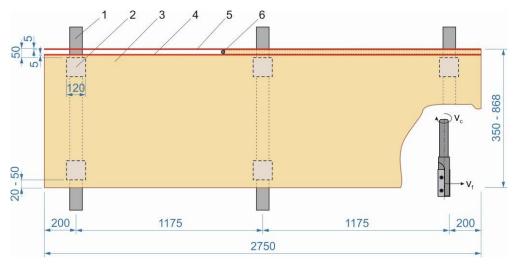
Scheme of samples preparation (1 - CNC machining center transverse beam, 2 - vacuum suction cup, 3 - MDF board, 4 - sample "P", 5 - sample "L", 6 - router bit, v_c - direction cutting speed, v_f - direction of sliding velocity)
